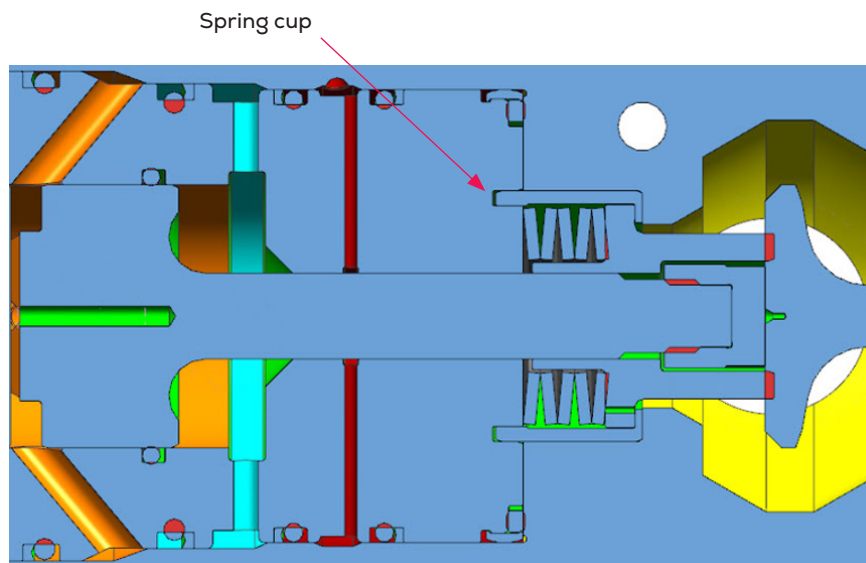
Belleville spring could drop down and get wedged between the WVFC and the gas block
